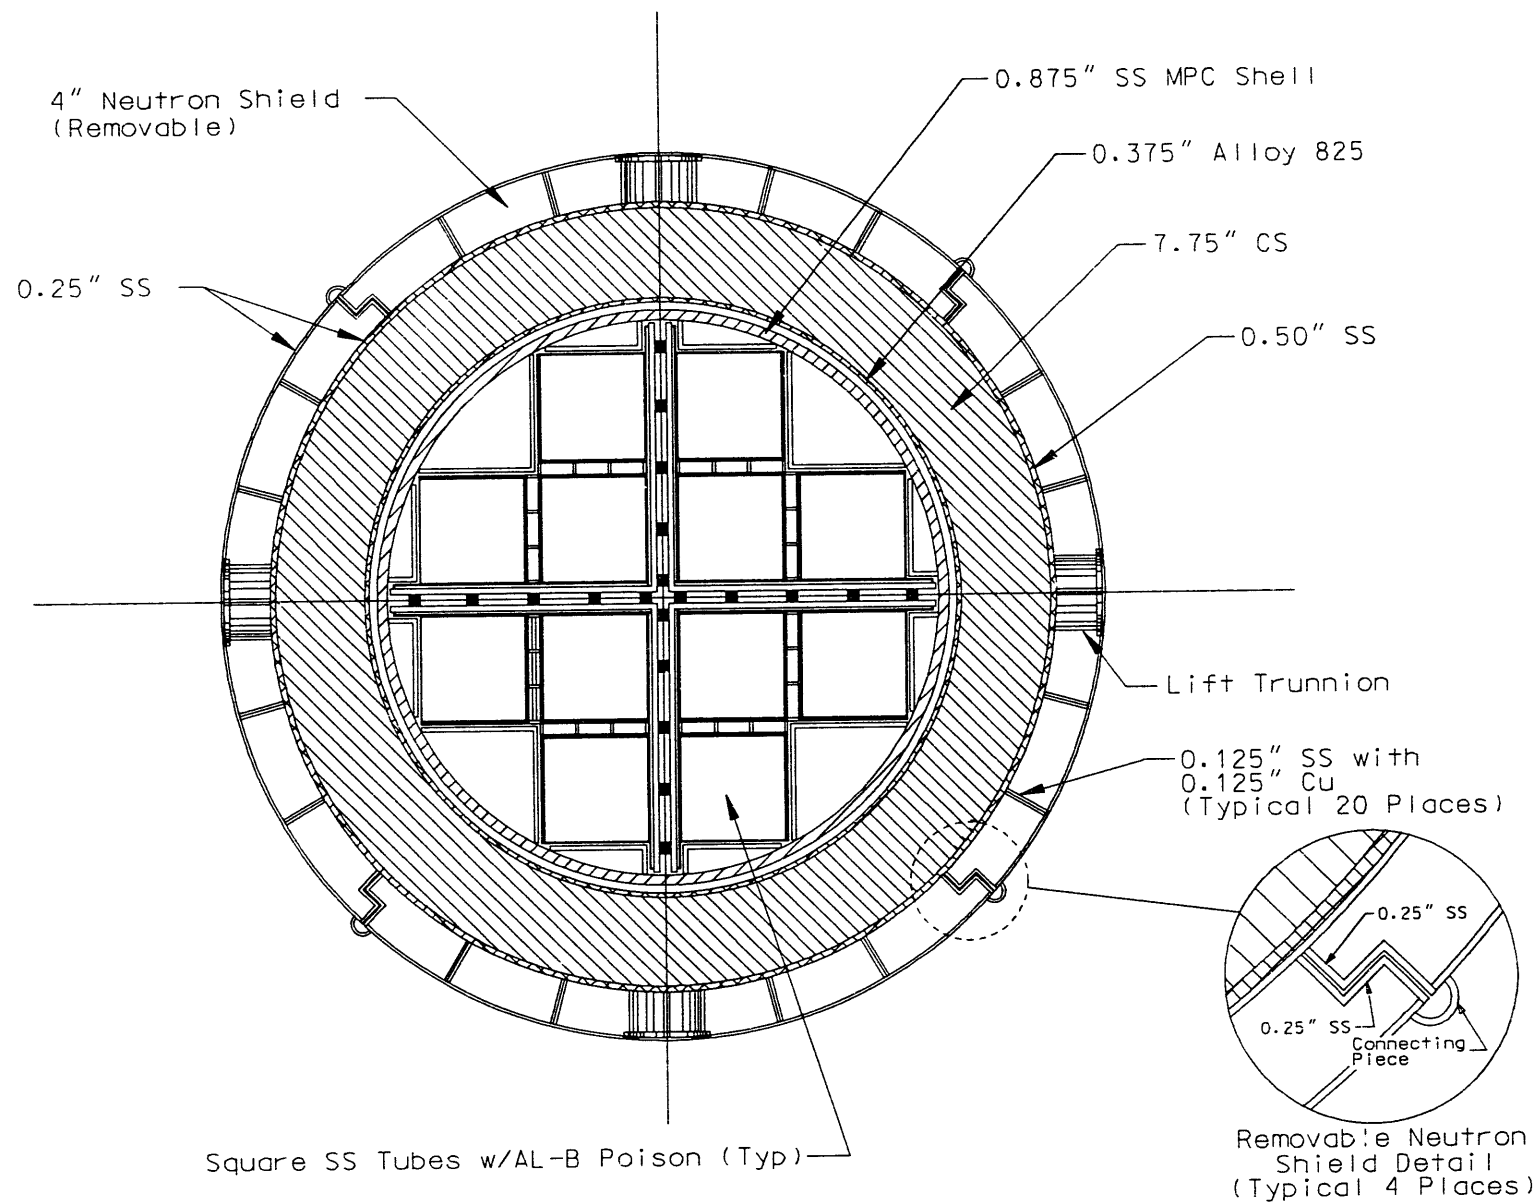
90-Ton MPU For 12 PWR Fuel Assemblies (End Section View)
